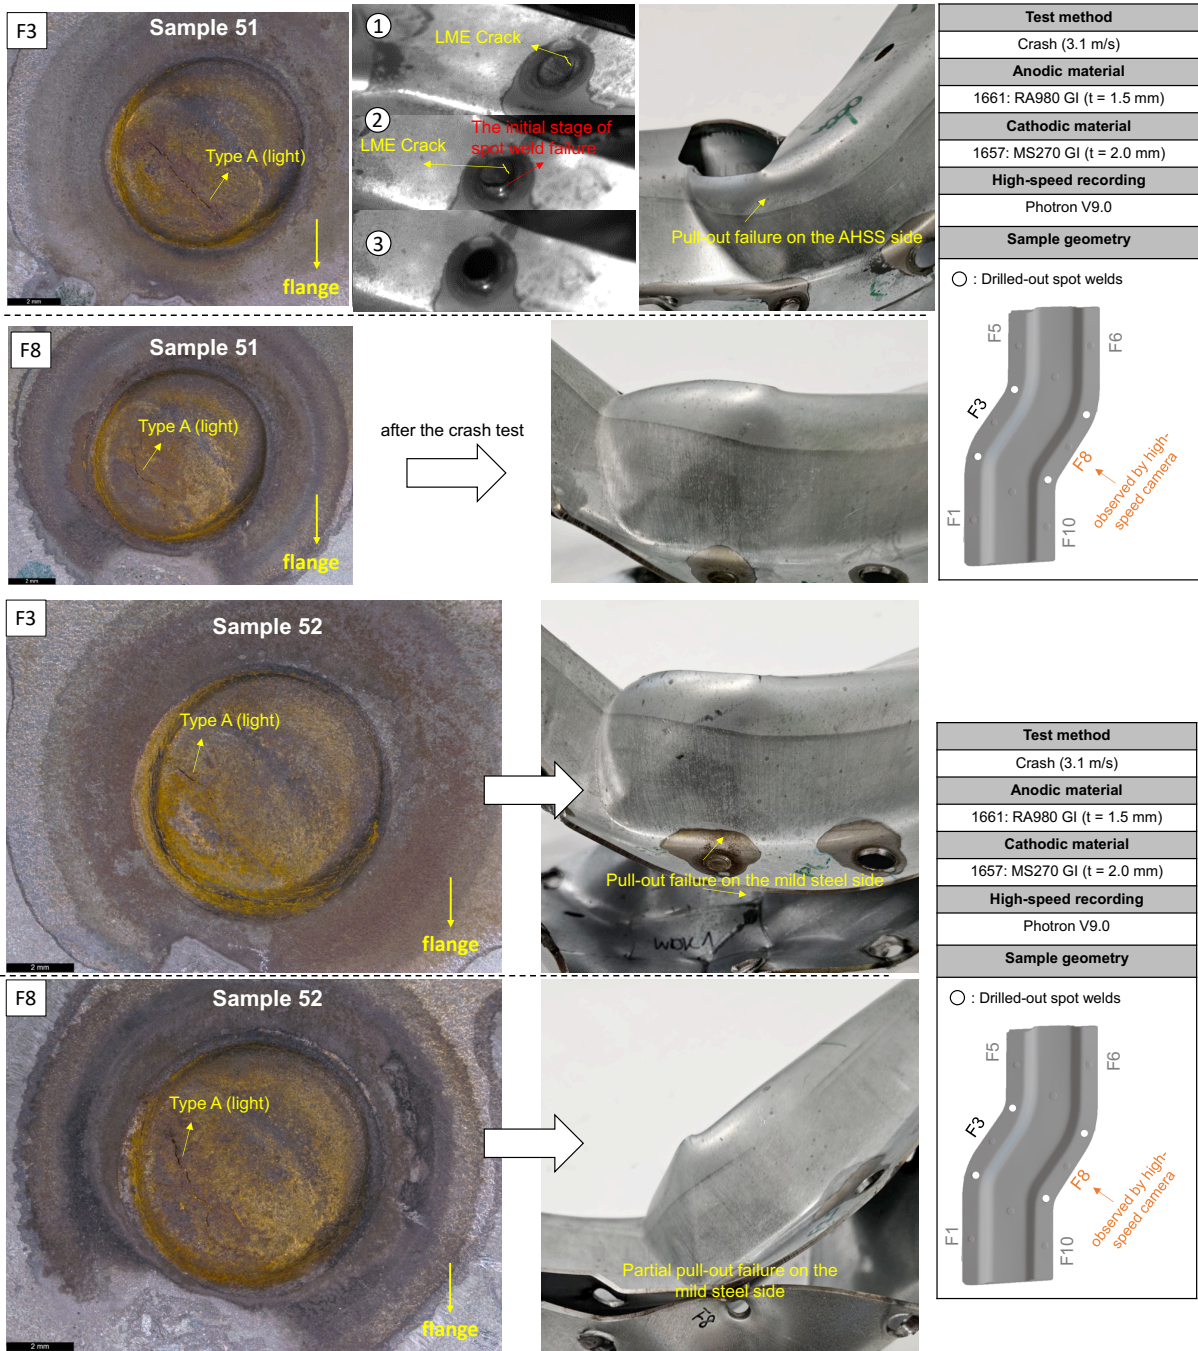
Spot weld failure in sample 51 and 52 (MTC1)
